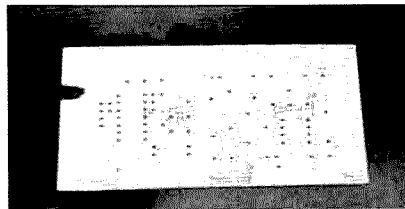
Photo E. Top of drilled PC board showing accurate hole pattern when using perfboard template.
